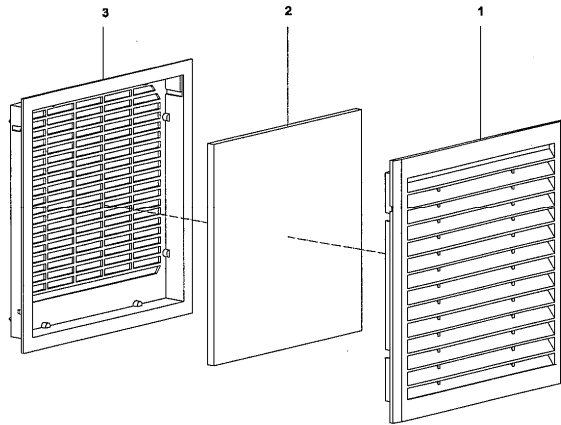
VENTILATION FILTER ASSEMBLY
